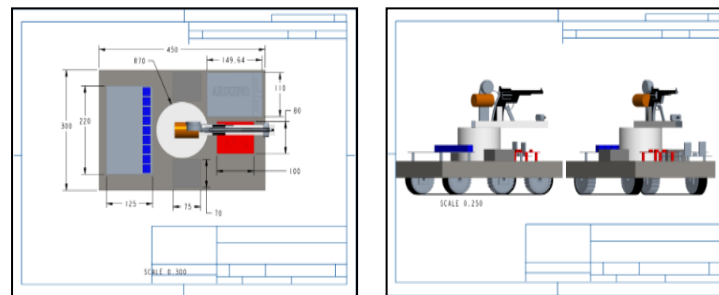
The 2d design of the robot (a) Side view, (b) Top view (c) Front view.
